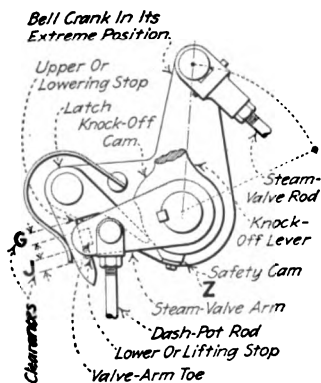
Showing clearances which should be equalized when adjusting length of dash-pot rod. (The clearances, G and J, are exaggerated for clearness.)
